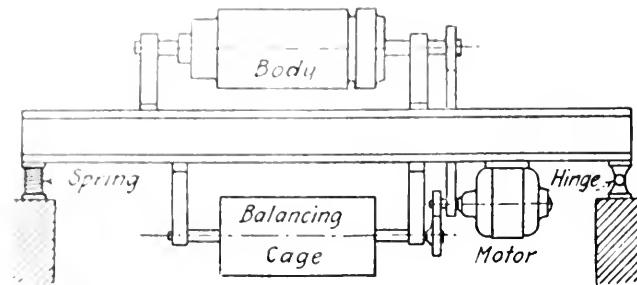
SQUIRREL-CAGE TYPE OF DYNAMIC BALANCING MACHINE
